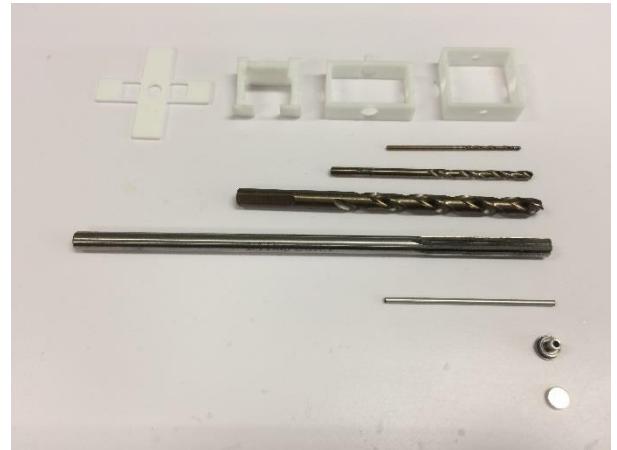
Gimbal preparation materials. Clockwise from top left: Cross (not used until next step), gimbal platform, gimbal rectangle, drill bits (1/16" 1/8" and 1/4"), 1/4" reamer, sample tube, sample bearing, sample magnet
